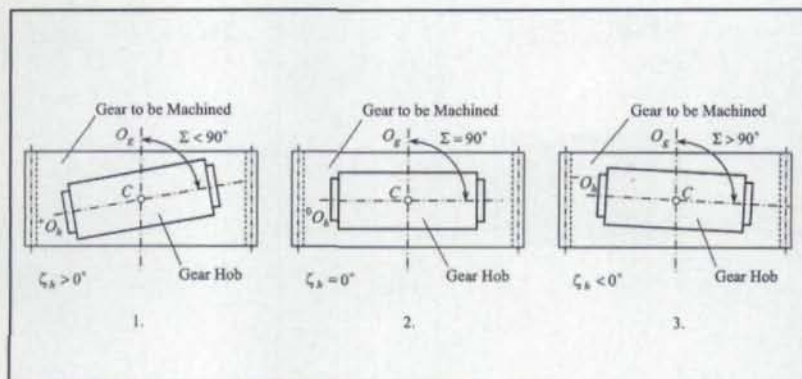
Relative orientation of the spur gear to be machined and of the gear hob with the gear hob-setting angle ζ_h 1-positive, 2-equal to zero, and 3-negative.
